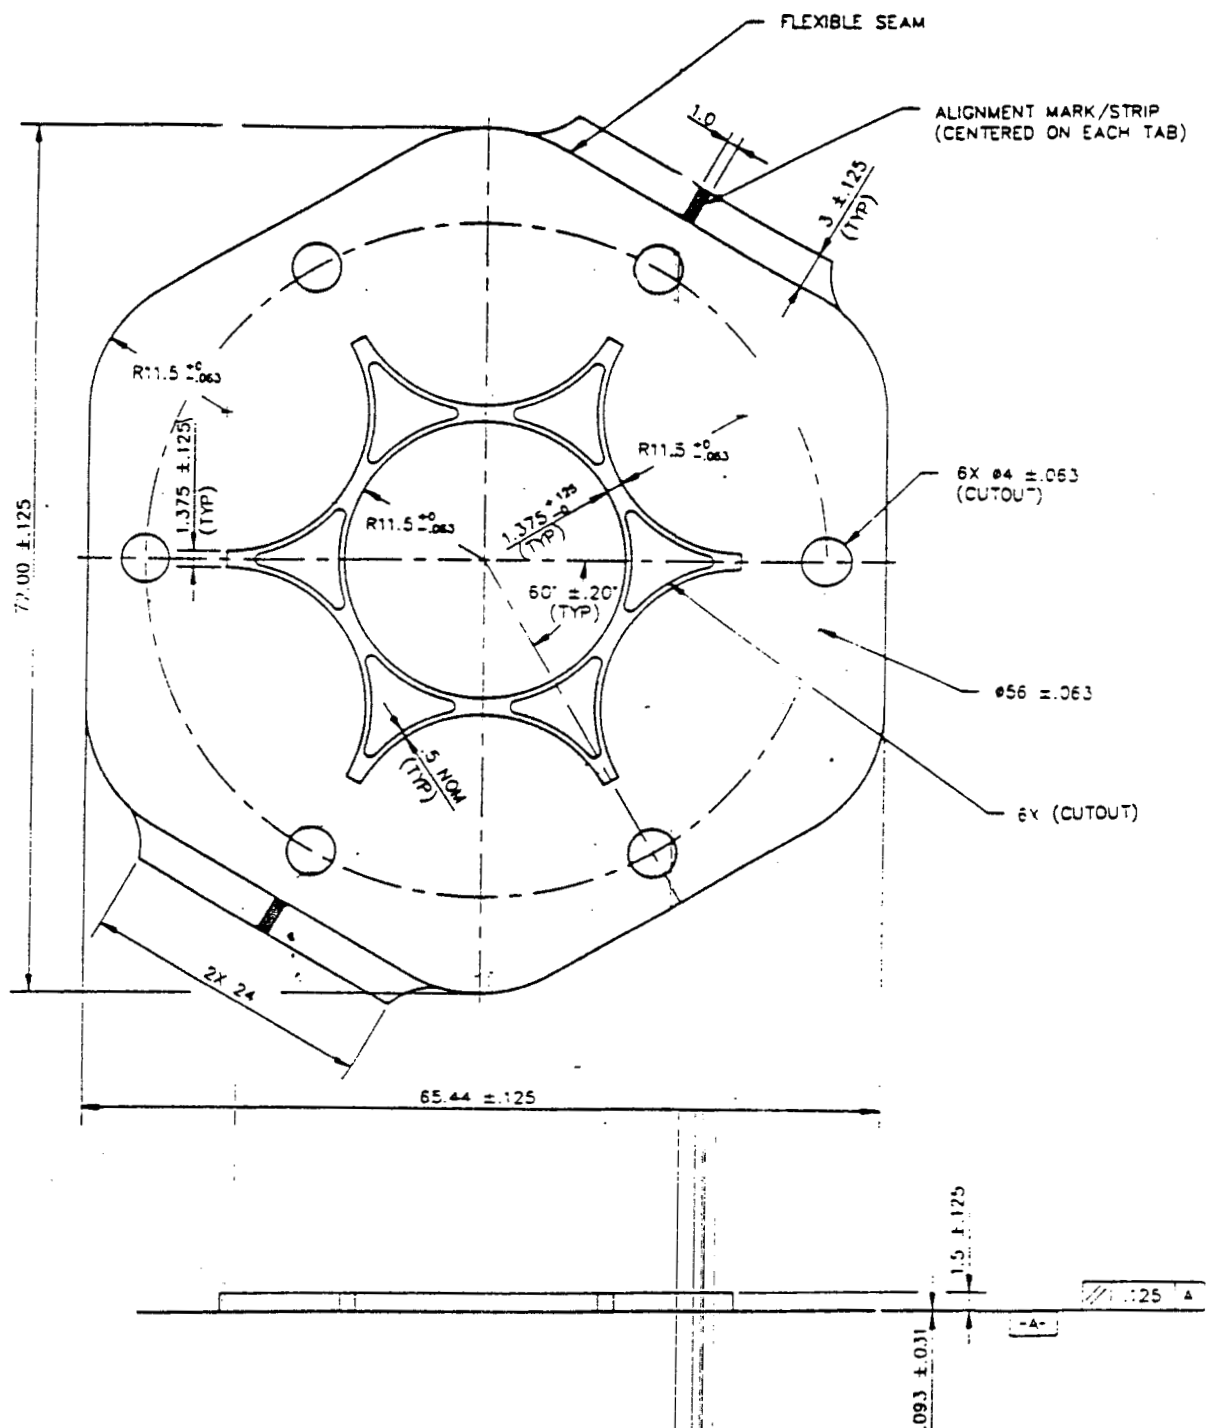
Slip Sheet Design for Contact Handled Waste Drums
